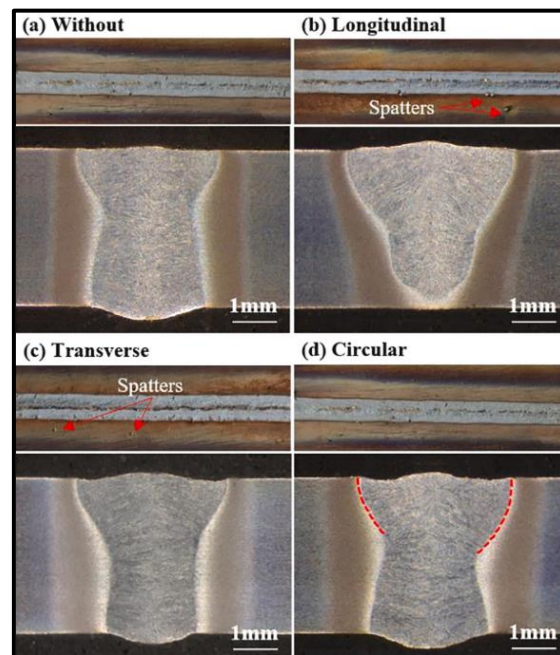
Macrostructure of the surface and weld cross-sections produced by different laser oscillating [7]
